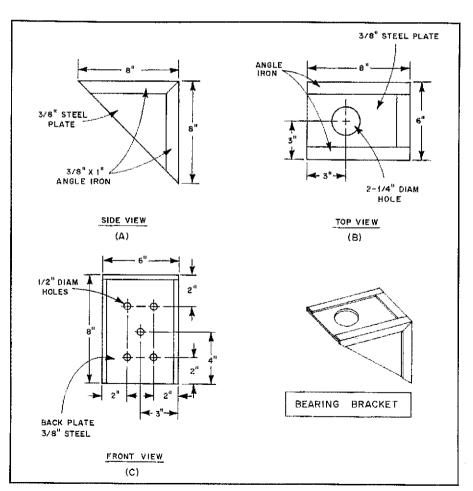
Mechanical illustration for constructing the top bracket. This section holds only the mast up to the antenna. Dimensions for the side view are shown at A, B shows the top view and C allows a view of the front. Construction information is given in the text.
